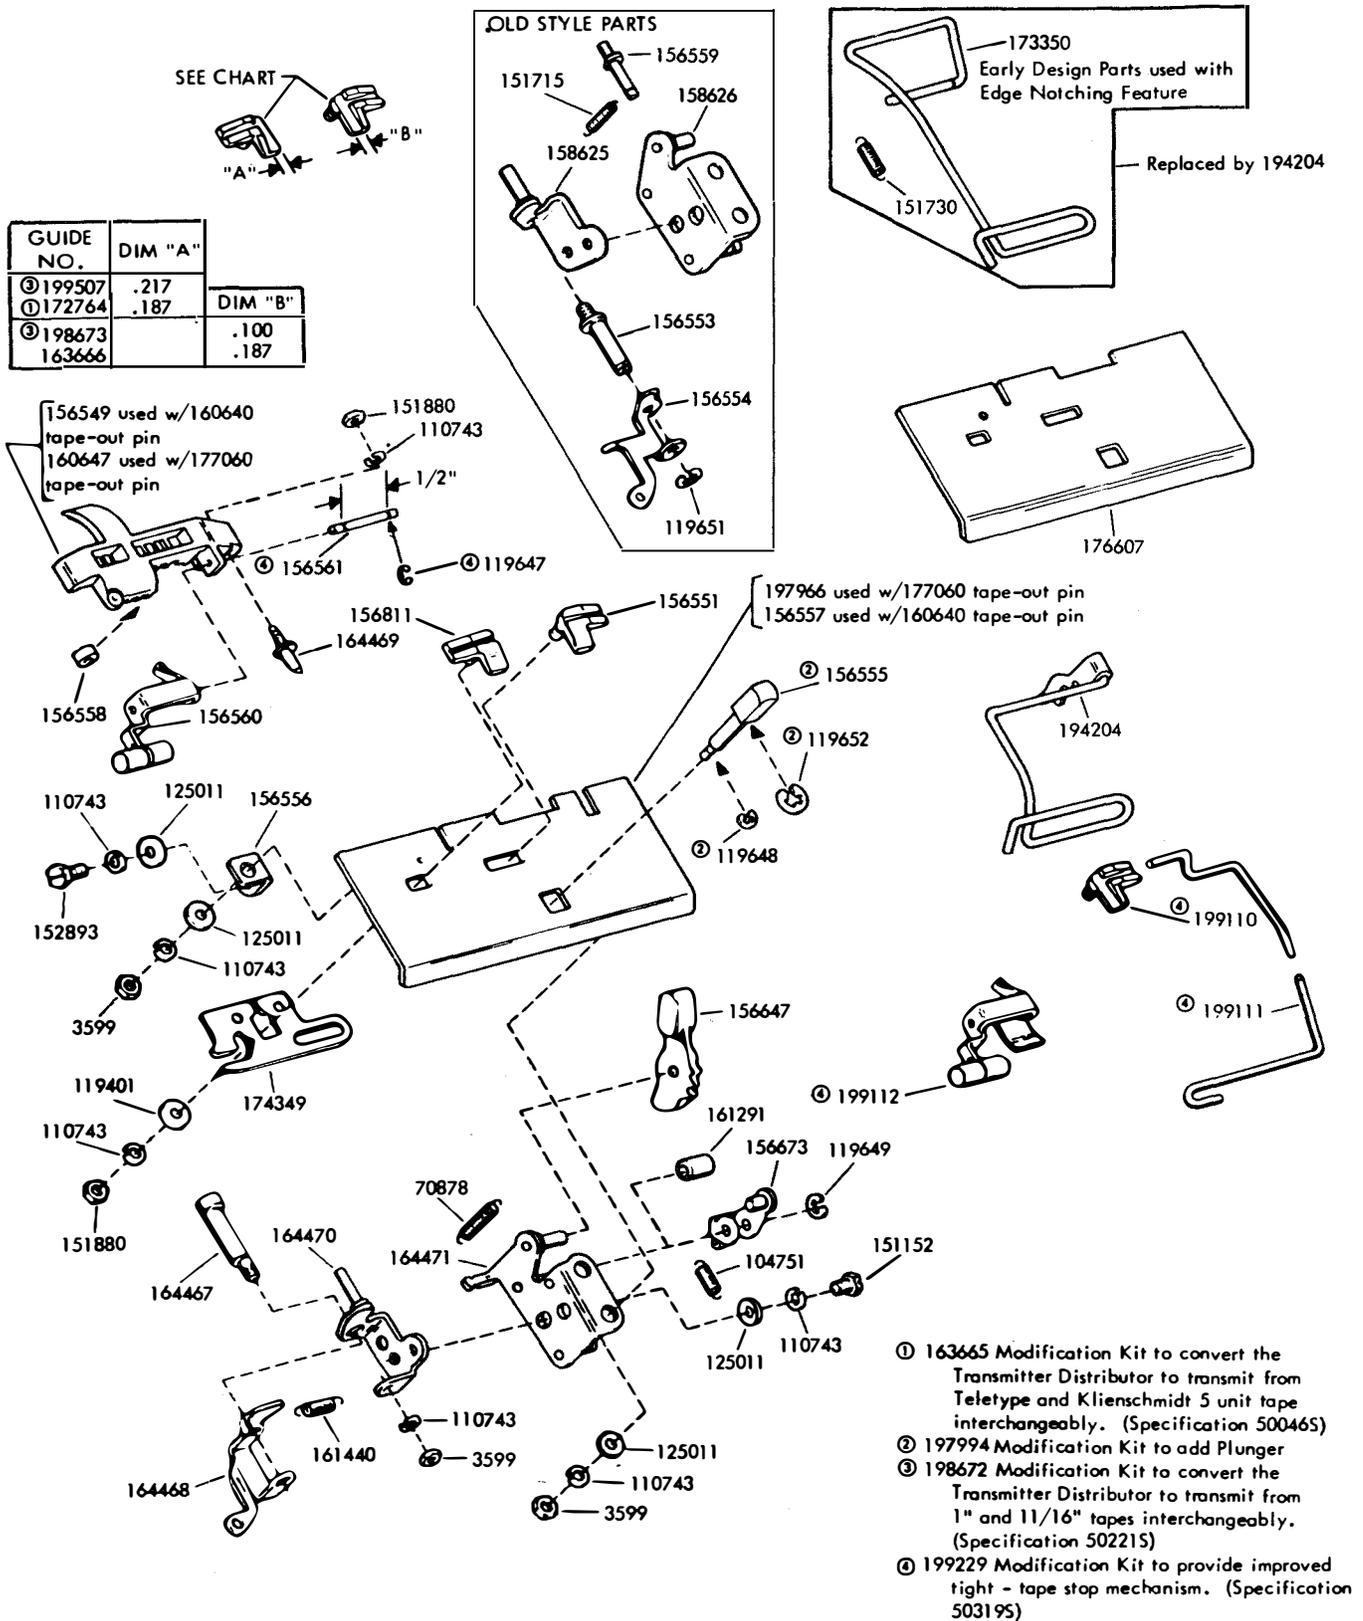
Tape Guide Plate Mechanisms (Sheet 1 of 3)
